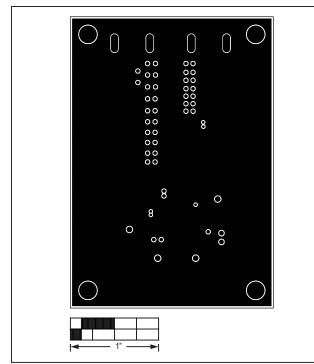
MAX20051 EV Kit PCB Layout—AGND Layer 2
